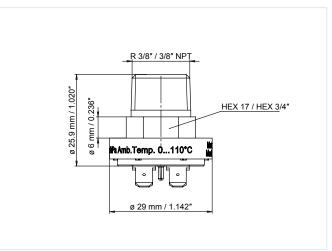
GV30-Switch with thread to main valve outlet (main gas).
